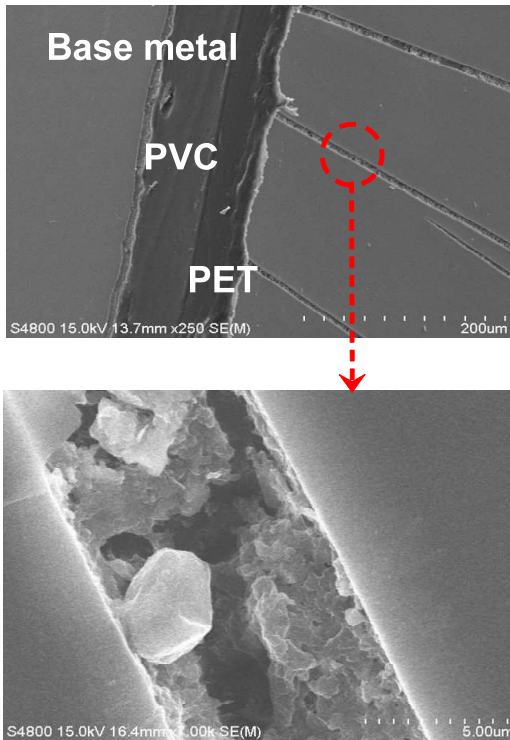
Micro cracks on PET coating by friction between blank holder and VCM sheet
